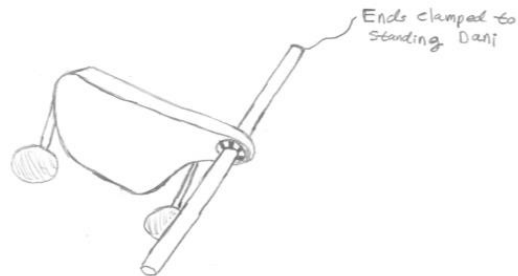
Concept with two wheels on putter and shaft clamped to Standing Dani.
